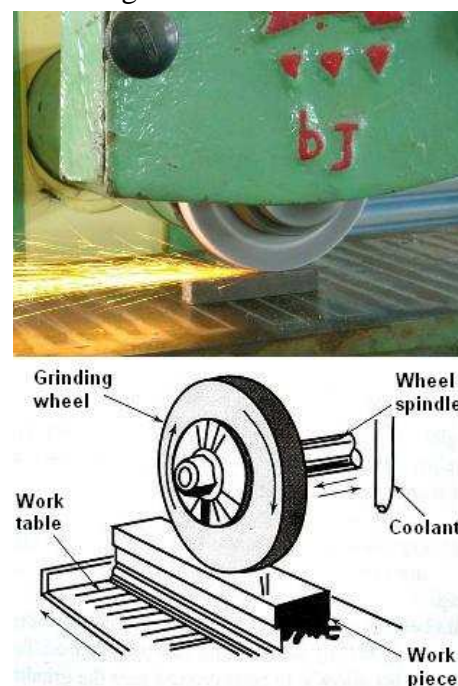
Horizontal spindle and reciprocating table surface grinding process
